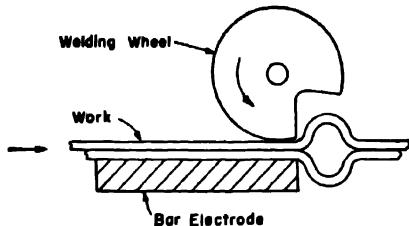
Use of niched welding wheel for seam welding to a header.
